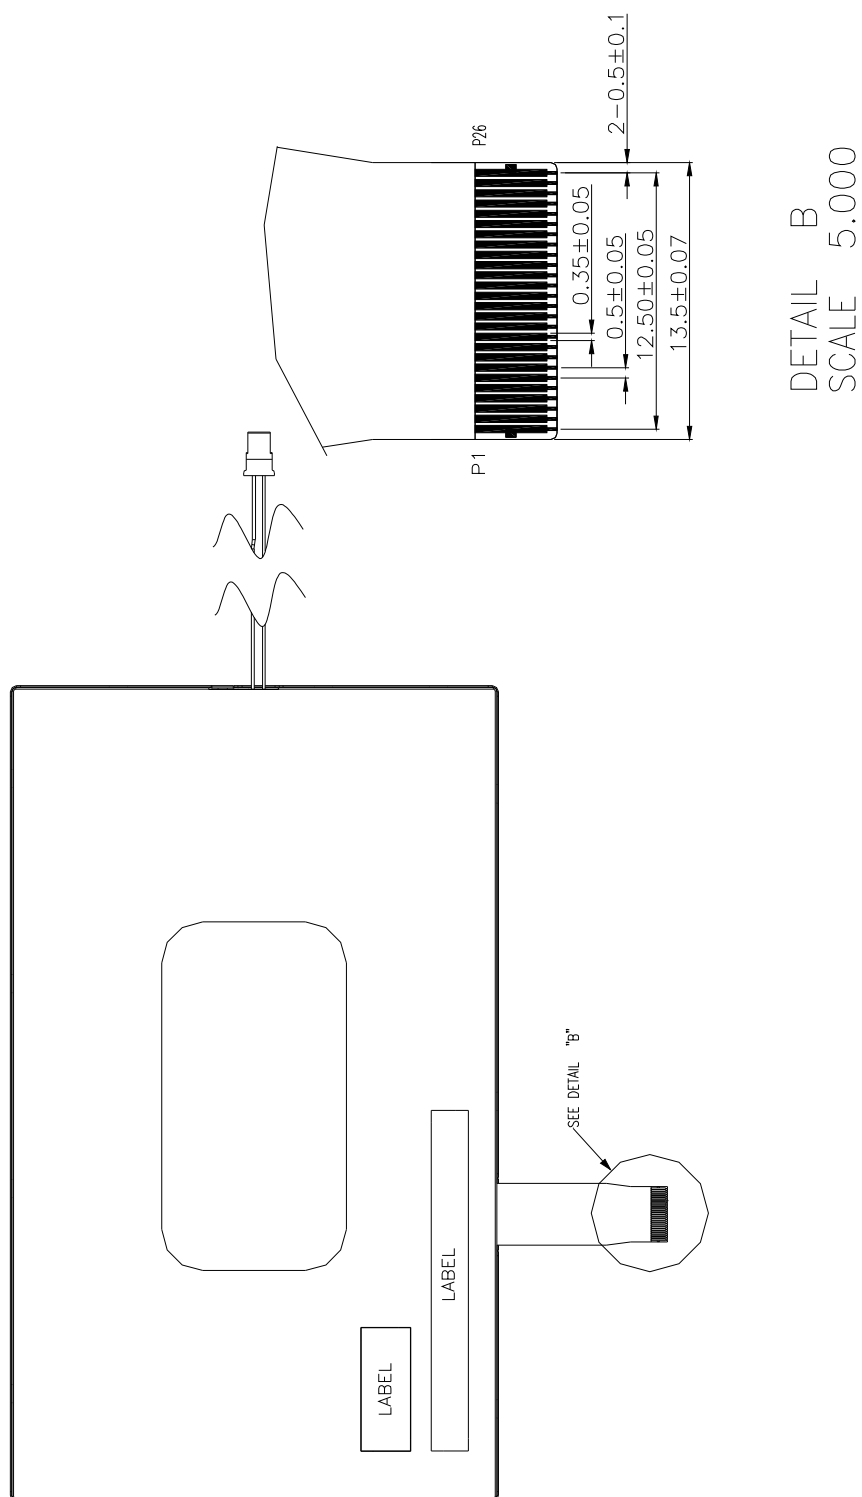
(b) Outline dimension of TFT-LCD module (Back side)
